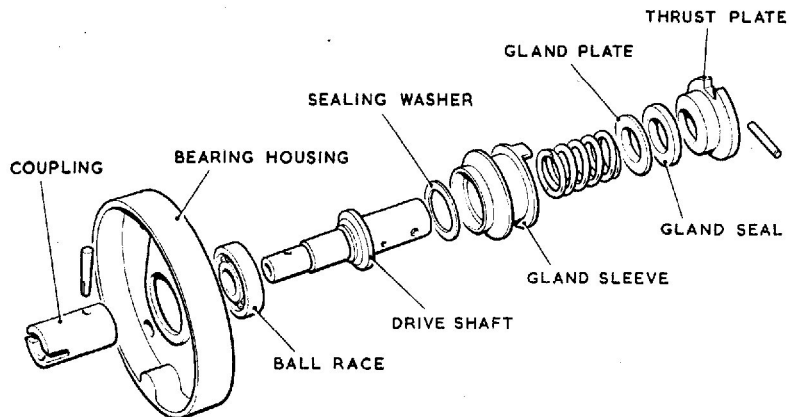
Exploded view of drive shaft assembly (gland seal)
